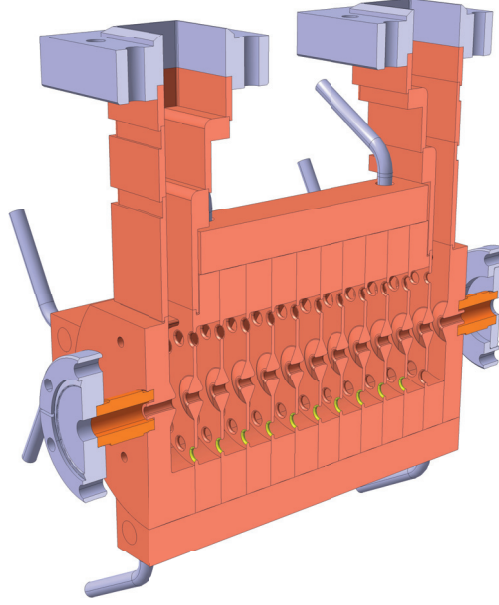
Cut view of the BTW prototype mechanical design. Courtesy of M. Garlasche' and M. Timmins, CERN.
